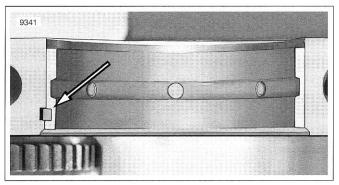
Crankshaft Bearing Notch (crankshaft removed for clarity)
